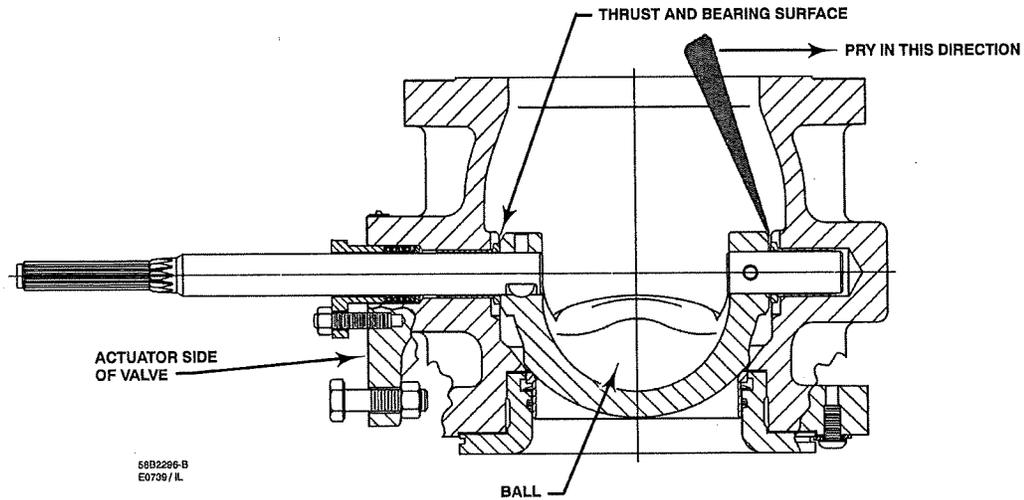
Typical Vee-Ball Valve Showing Pry Bar
